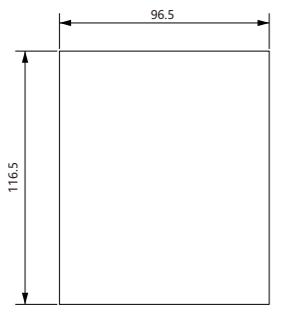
tray hole size (panel sheet metal thickness 1.0-1.2mm)
